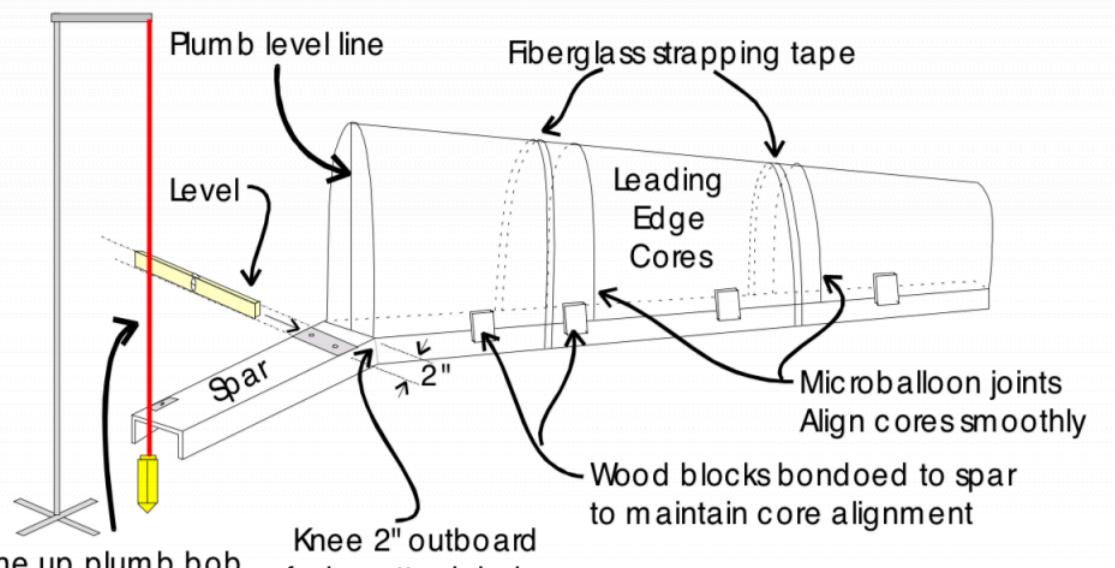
Jigging Wing Leading Edge Cores for Attaching Spar
